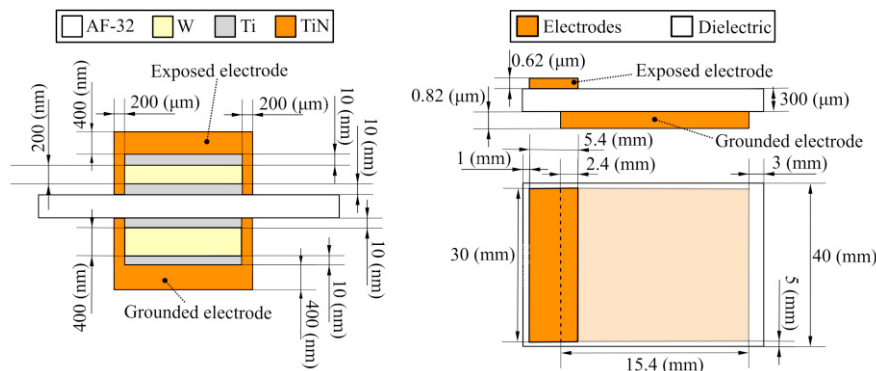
Deposition layer thicknesses (left); Actuator geometry and dimensions (right).
